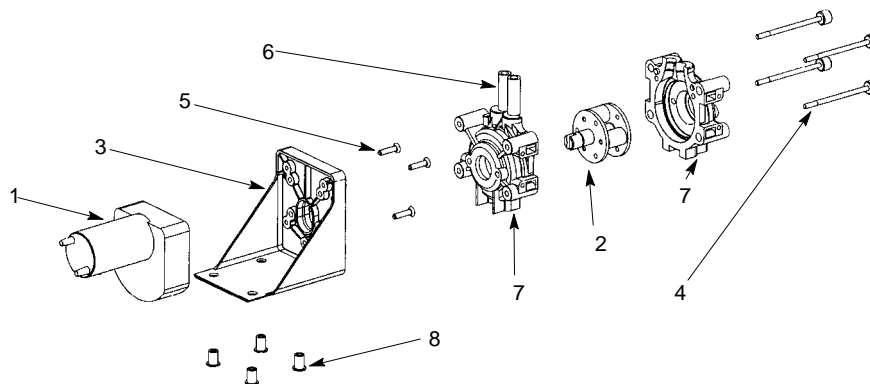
PUMP AND MOTOR ASSEMBLY
